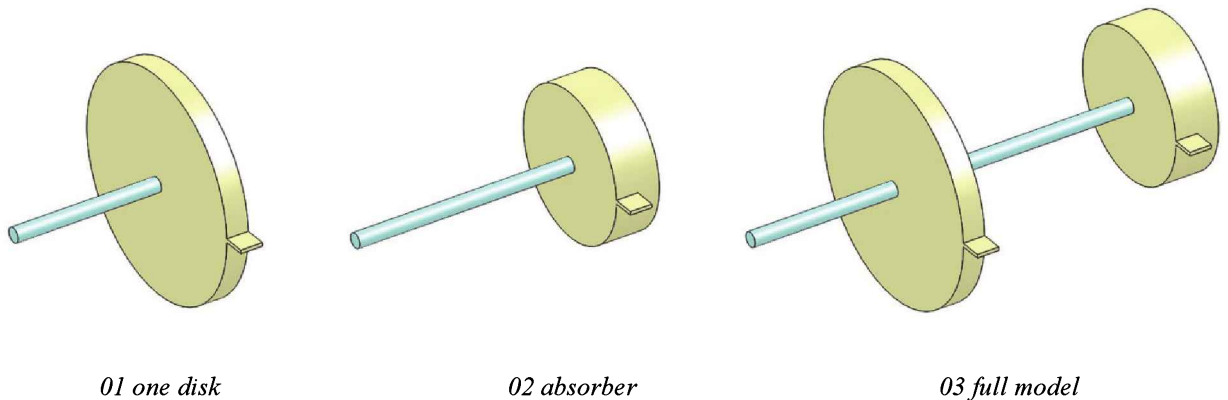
Three configurations of the VIB ABSORBER assembly.
